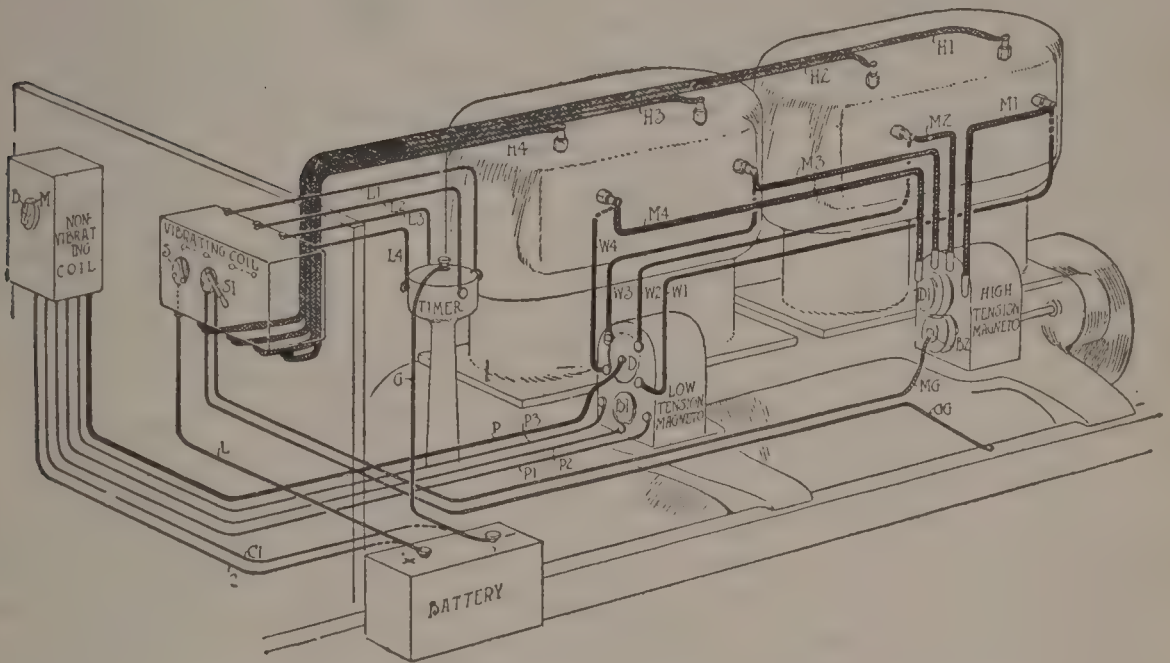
Four high-tension ignition systems installed on one four-cylinder engine
